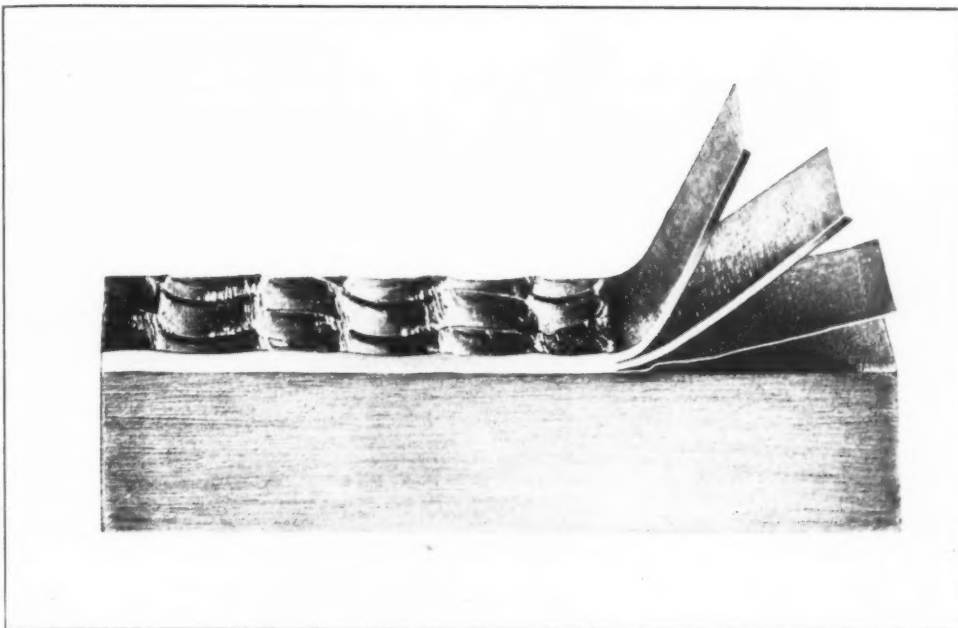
Specimen of Croloy Bonded Plate Made with Two Chromium Steel Sheets and One Nickel Sheet, Welded to the Baseplate
